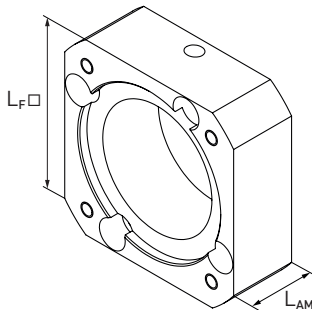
Motor adapter plate AM for linear modules HM-B, linear tables HT-B and cantilever axes HC without gearbox
